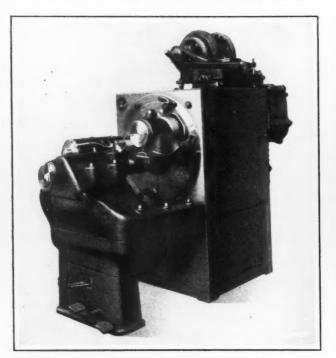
Potter & Johnston "Unimatic" Chucking Machine
